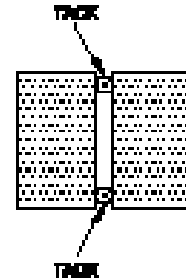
Temporary Tack welds on plate pipe
